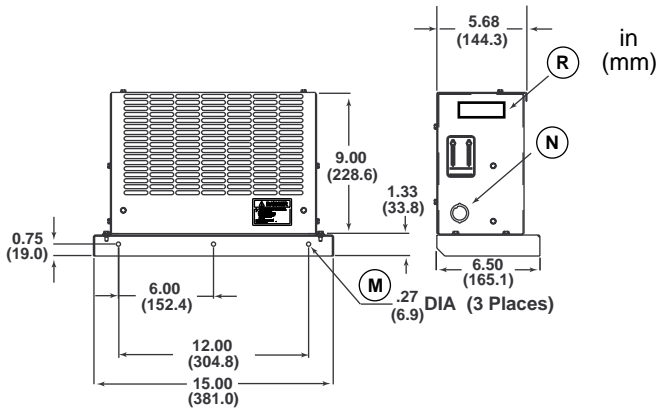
Dynamic Braking Resistor Assembly Terminals:
